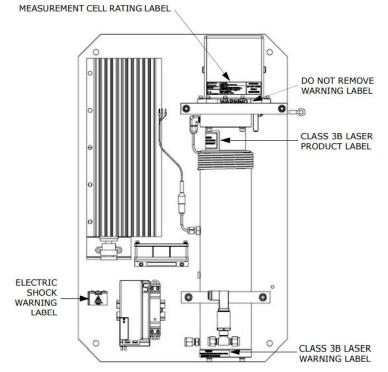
Label placement on sample cell panel assembly (8/28 m sample cell) (lower level)
